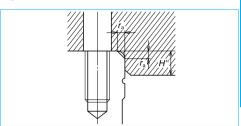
•11 Shoulder for the ball slide datum face
